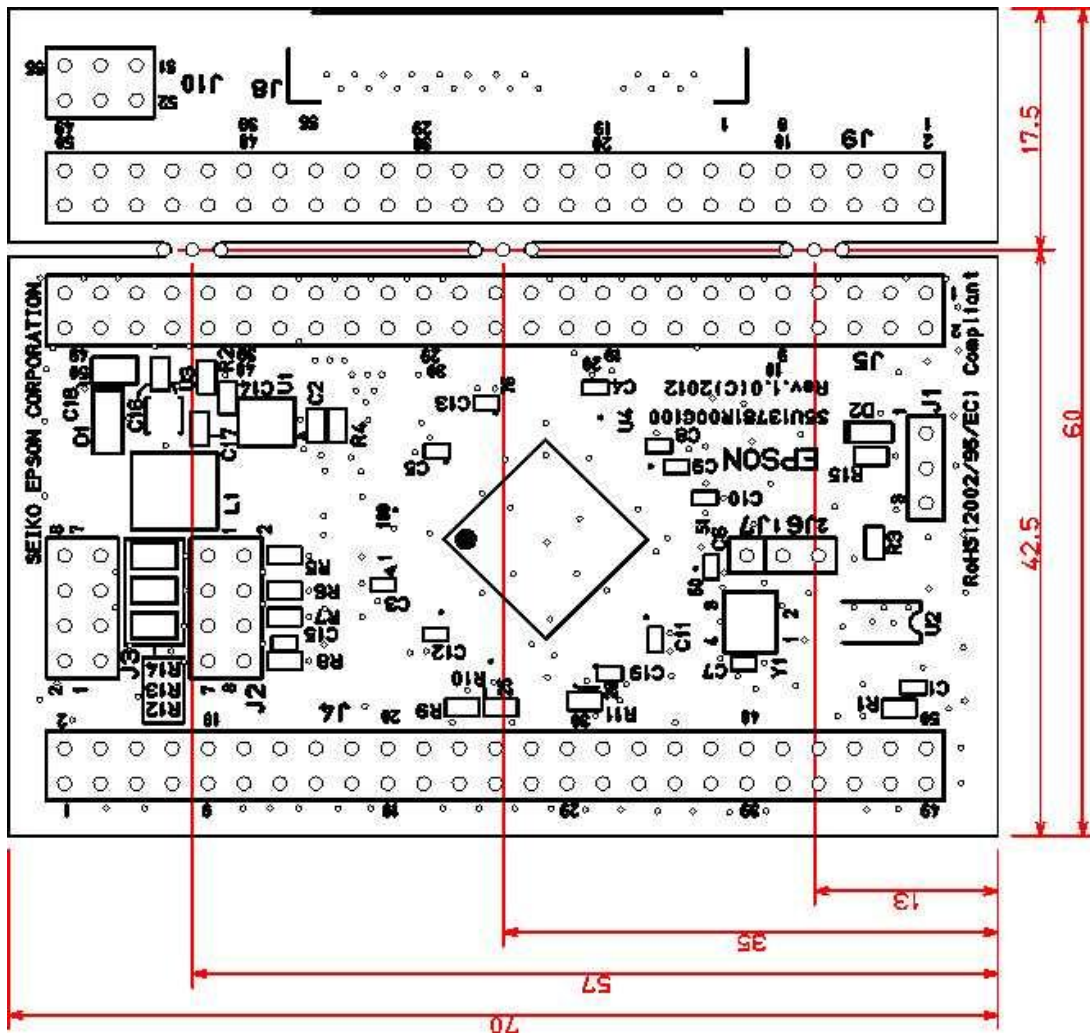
S5U13781R00C100 Board Dimensions (units: mm)
